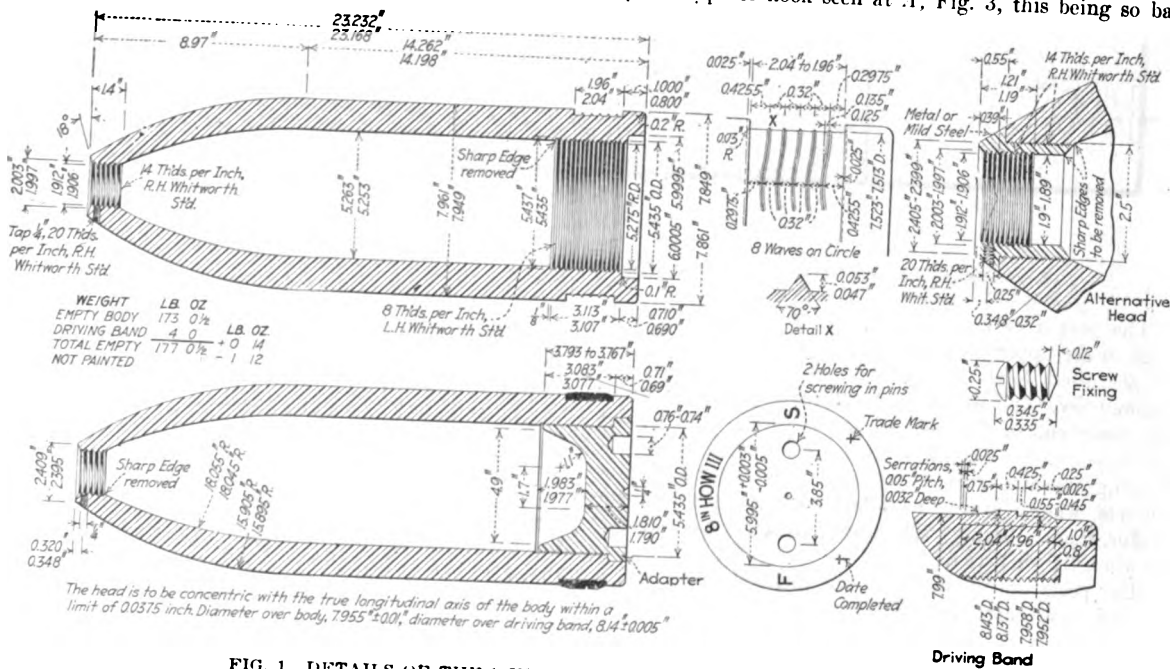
DETAILS OF THE 8-IN. HIGH-EXPLOSIVE HOWITZER SHELL
